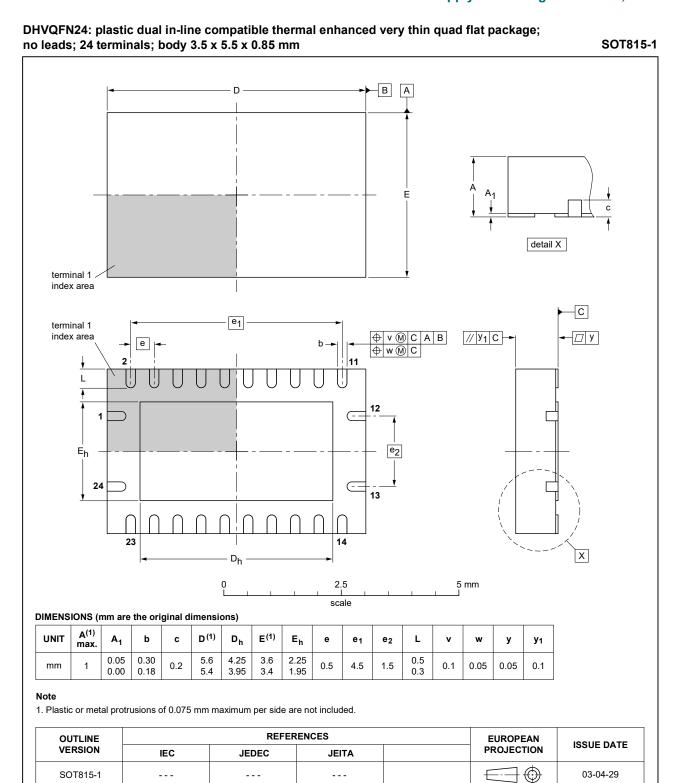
Package outline SOT815-1 (DHVQFN24)
